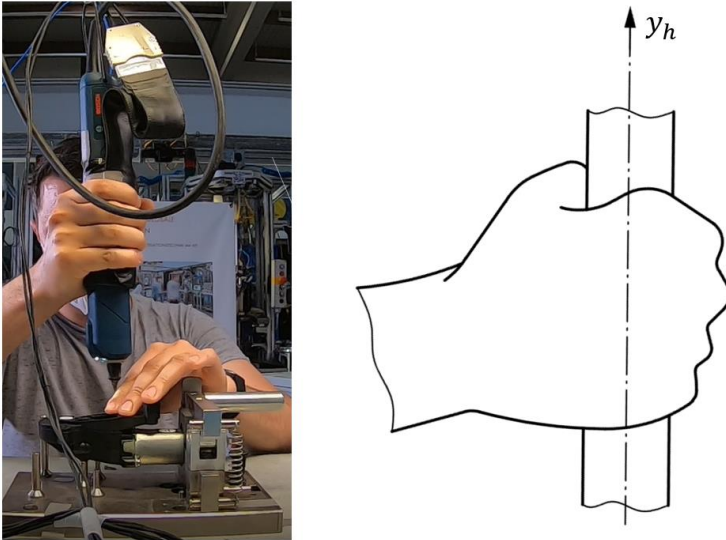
Comparison between the gripping of an in-line electric assembly screwdriver taken by the author (left) and the schematic hand position according to ISO 10068 (right). The illustration from ISO 10068 is twisted about 156° .
